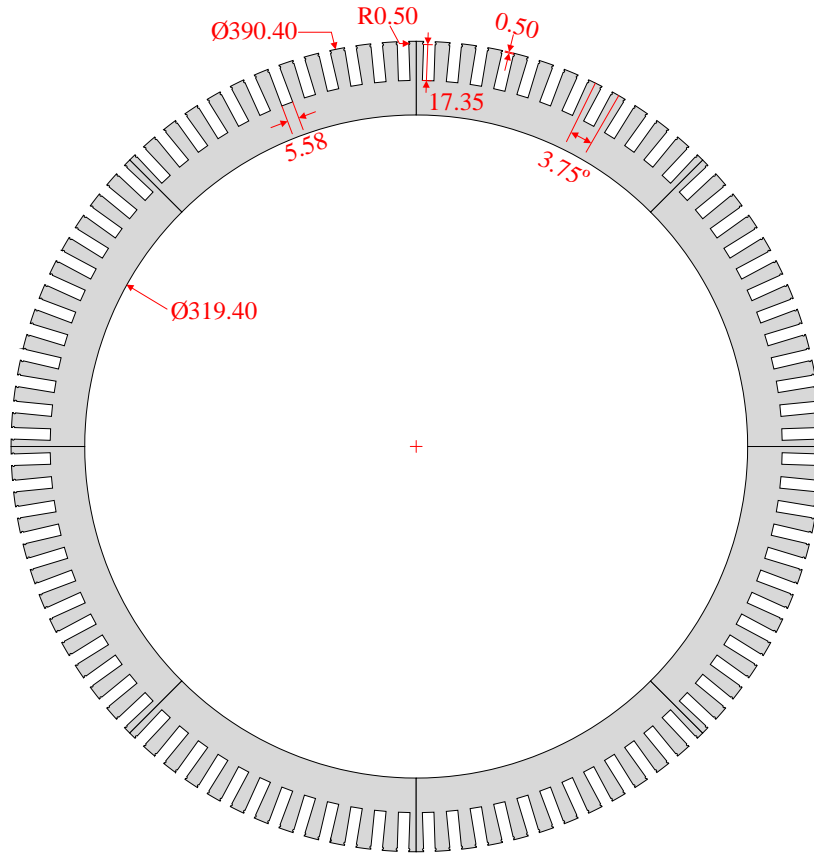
Stator of 96S/32P Prototyped Machine.
